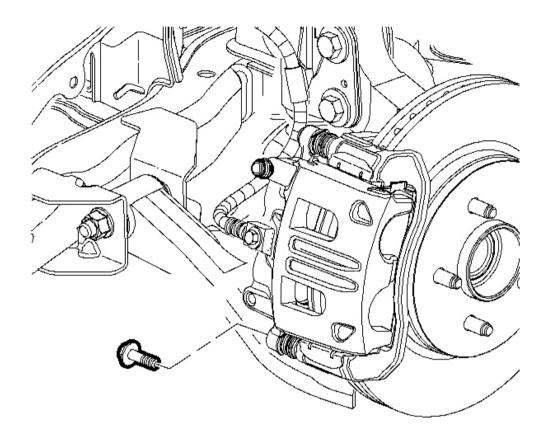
Removing/Installing Brake Rotor To Hub/Axle Flange Courtesy of GENERAL MOTORS CORP.
